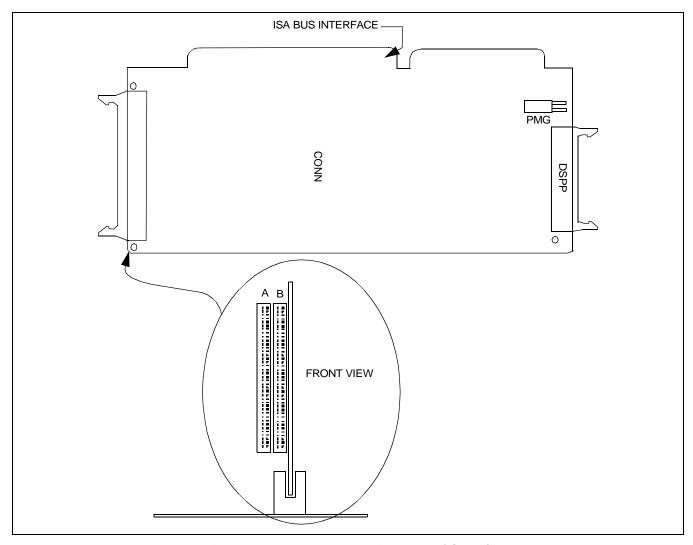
Face Layout of PZ-GT13 (ISAGT)
